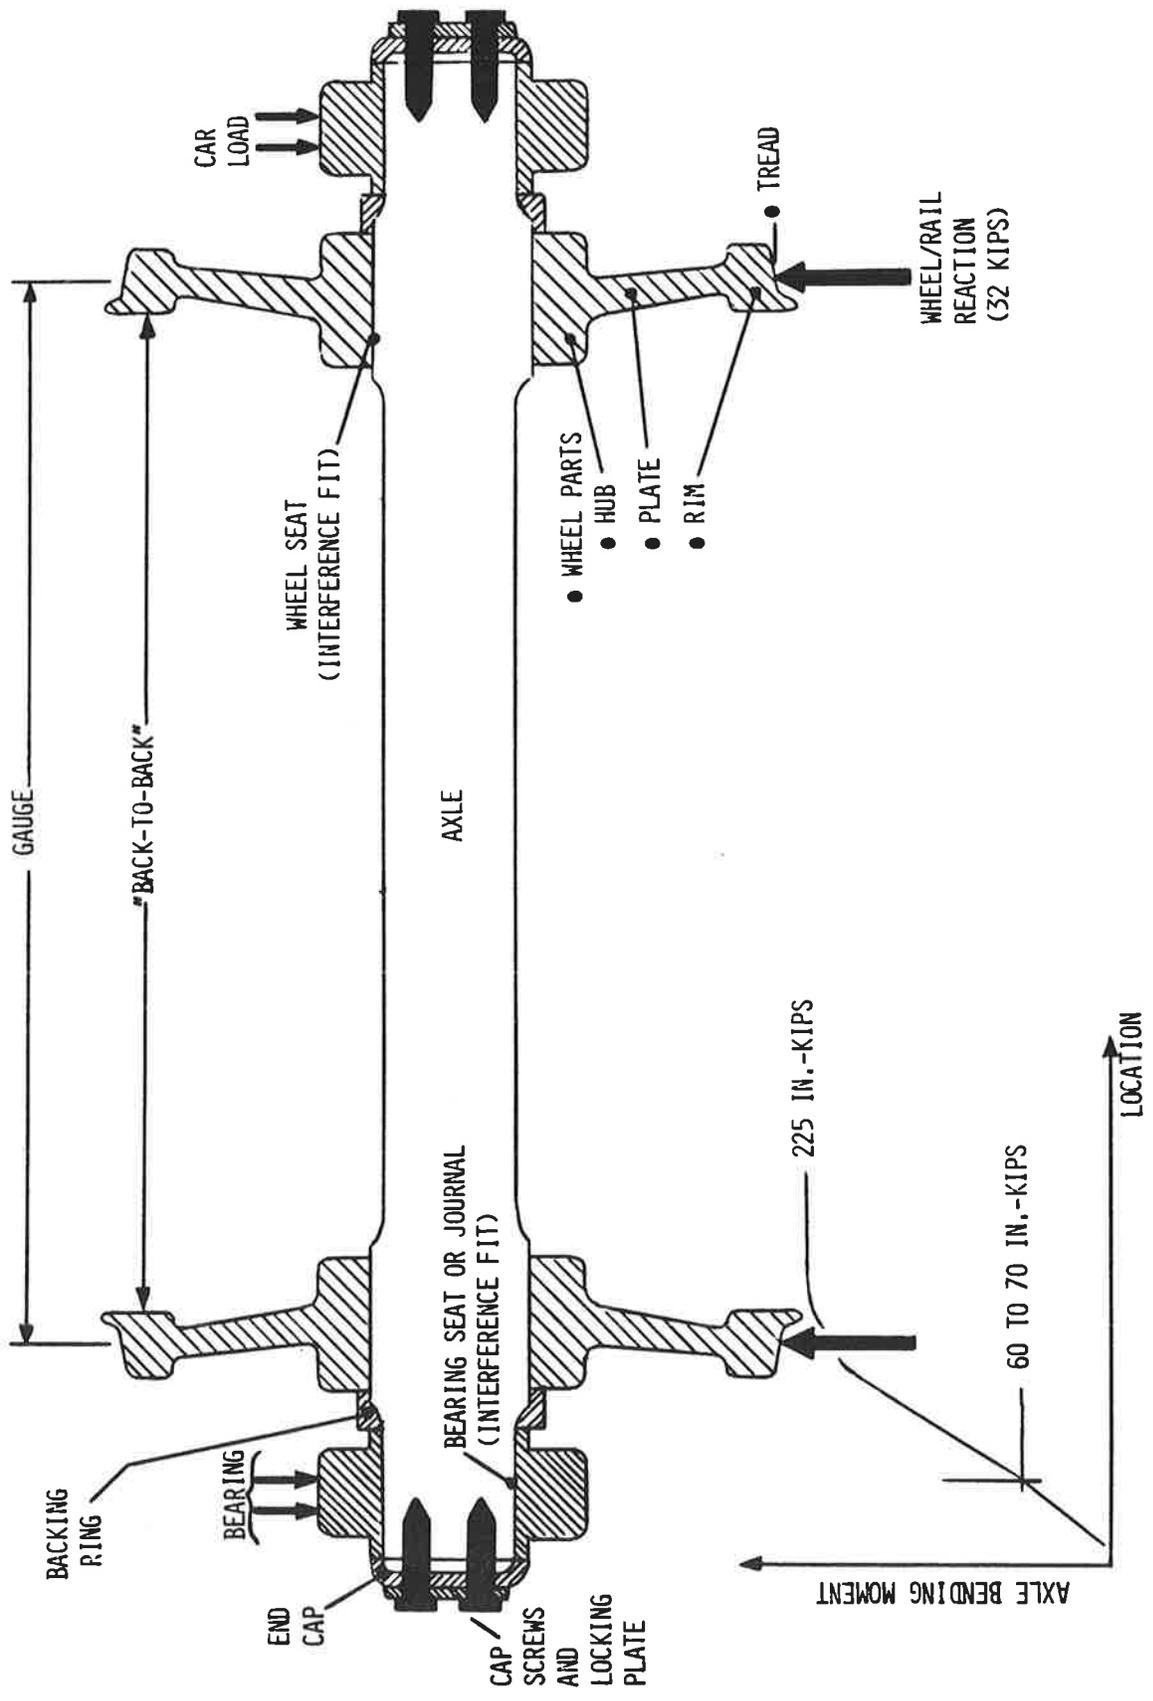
CONFIGURATION AND LOADING OF OUTBOARD-BEARING WHEELSET
